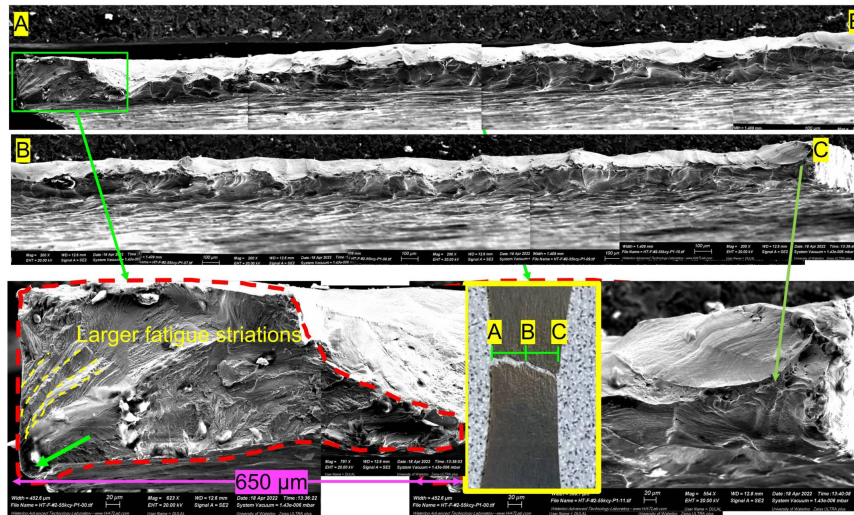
Typical fracture surface for cyclic tested 27PNX1350F at 150°C
